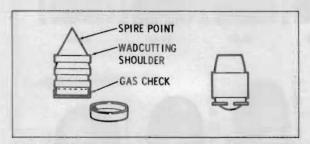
Gas checks are most often of the cup configuration shown at left; some bullets use a zinc washer, cast into the bullet, for a gas check.
